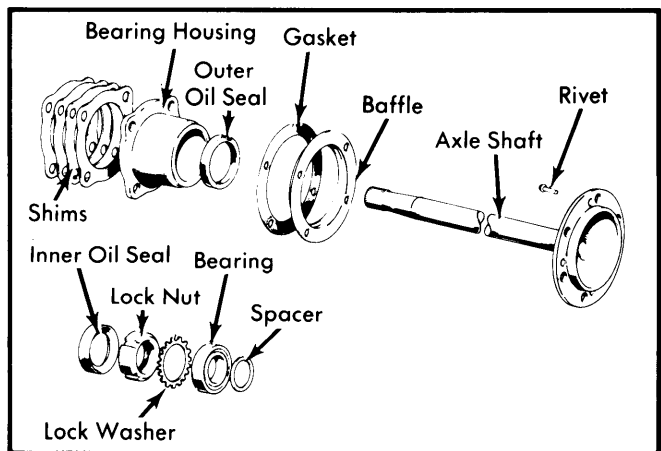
Exploded View of Pickup Axle Shaft Assembly
